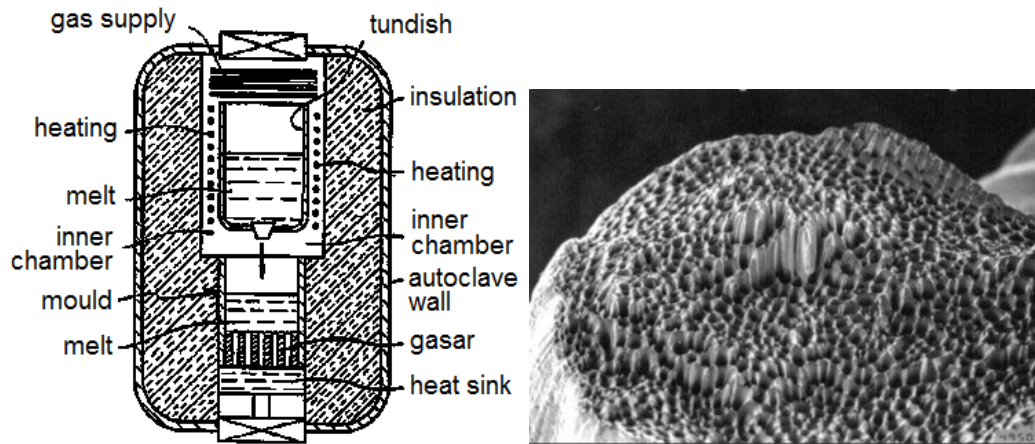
Apparatus used to fabricate aluminum foams by the gasar method, and view of the fracture surface on a copper gasar [7].
